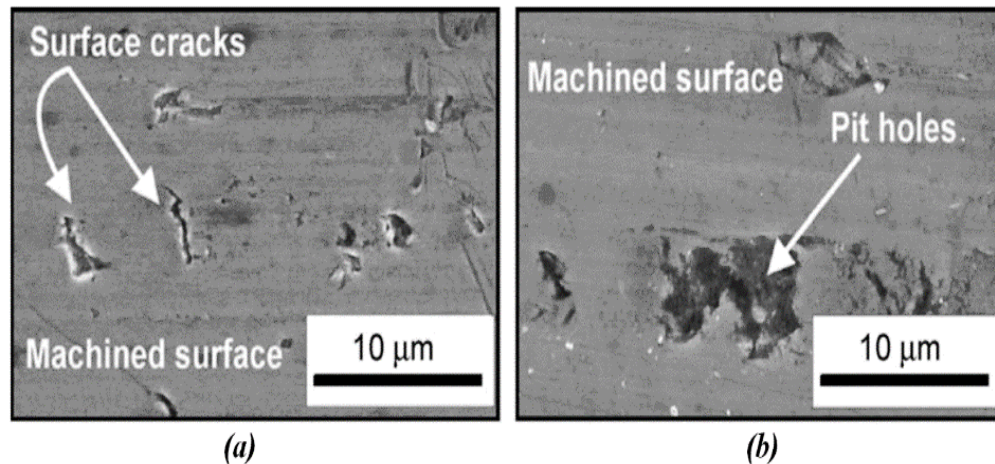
Influence of coolant on the nature of defects on the machined surface (a) Dry Cutting & (b) Wet Cutting
